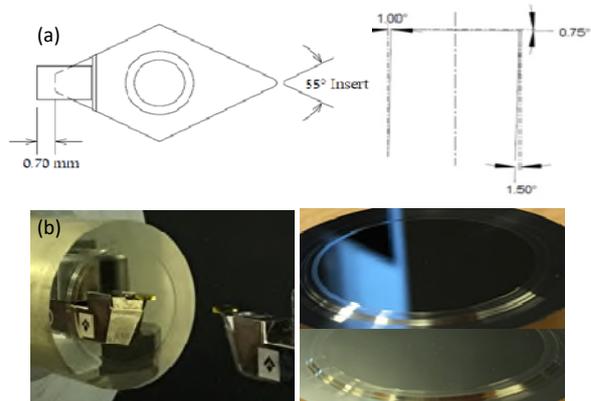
(a) The geometrical design of the facet diamond cutting tool and (b) the nanometric cutting setup and fabricated samples.
